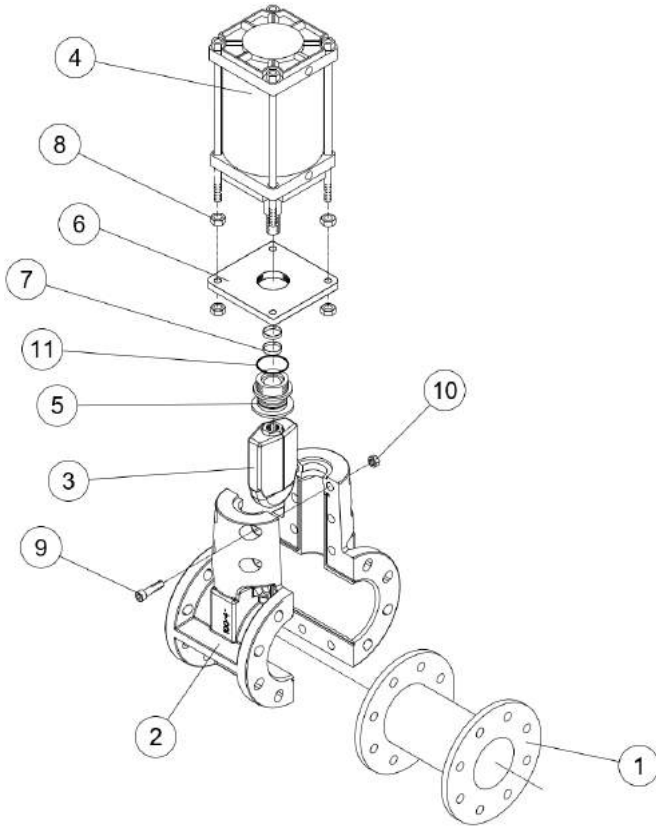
Exploded view of PVEG valve with pneumatic actuator.
